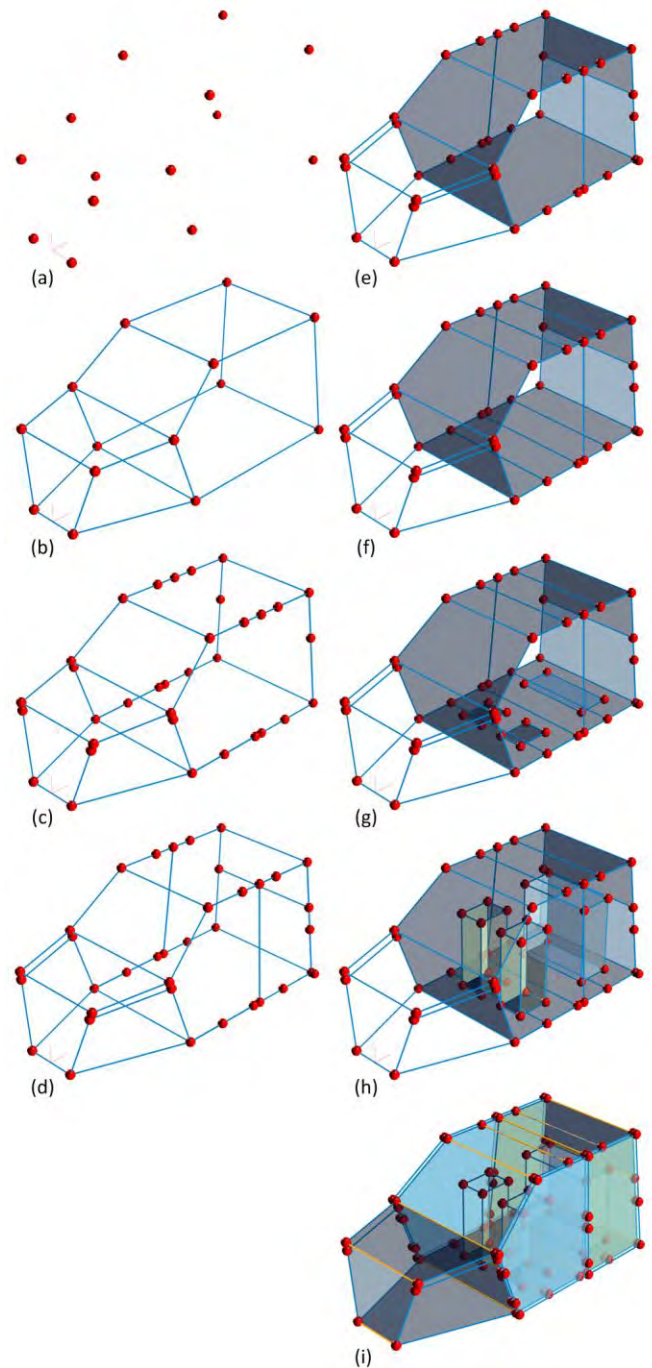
Pickup truck 4 door cab scaffold modeling steps defining architectural layout.
